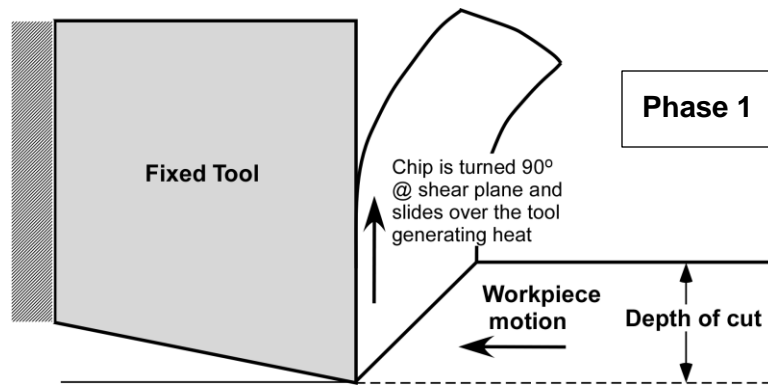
Geometry of the Cutting Process with a Fixed Tool – Phase 1. No Seizure of Chip to the Tool
